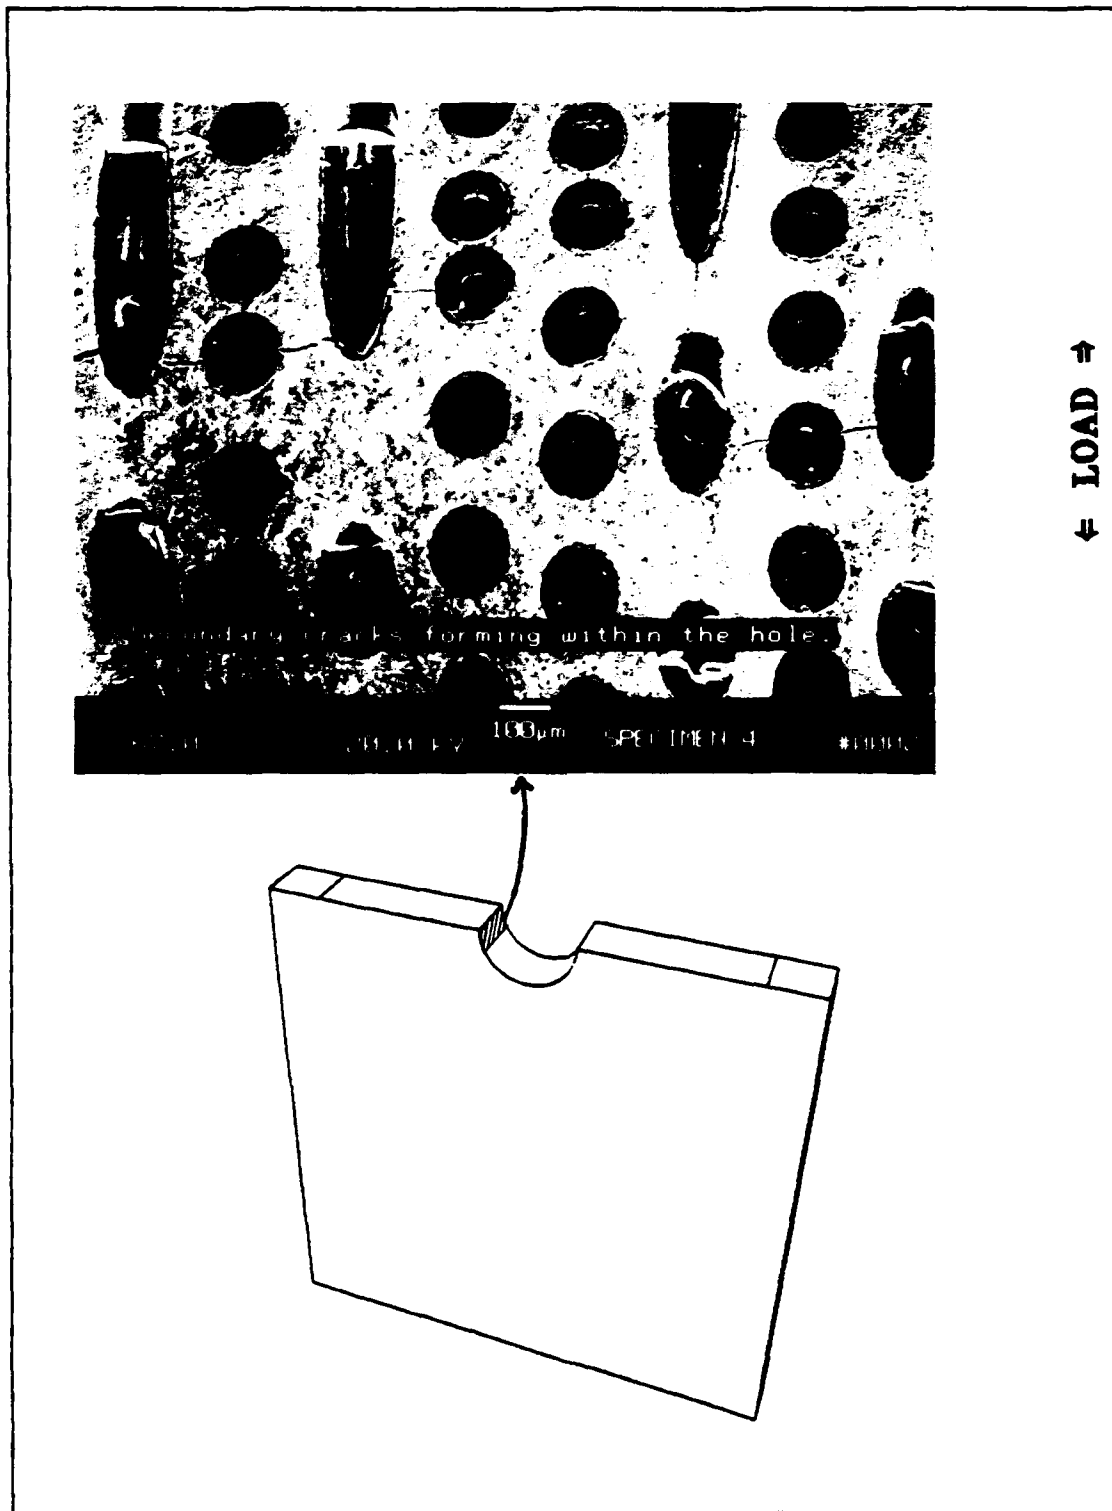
Minor Cracks Progressing into the Specimen (specimen face on the left and right edges of the photo)
